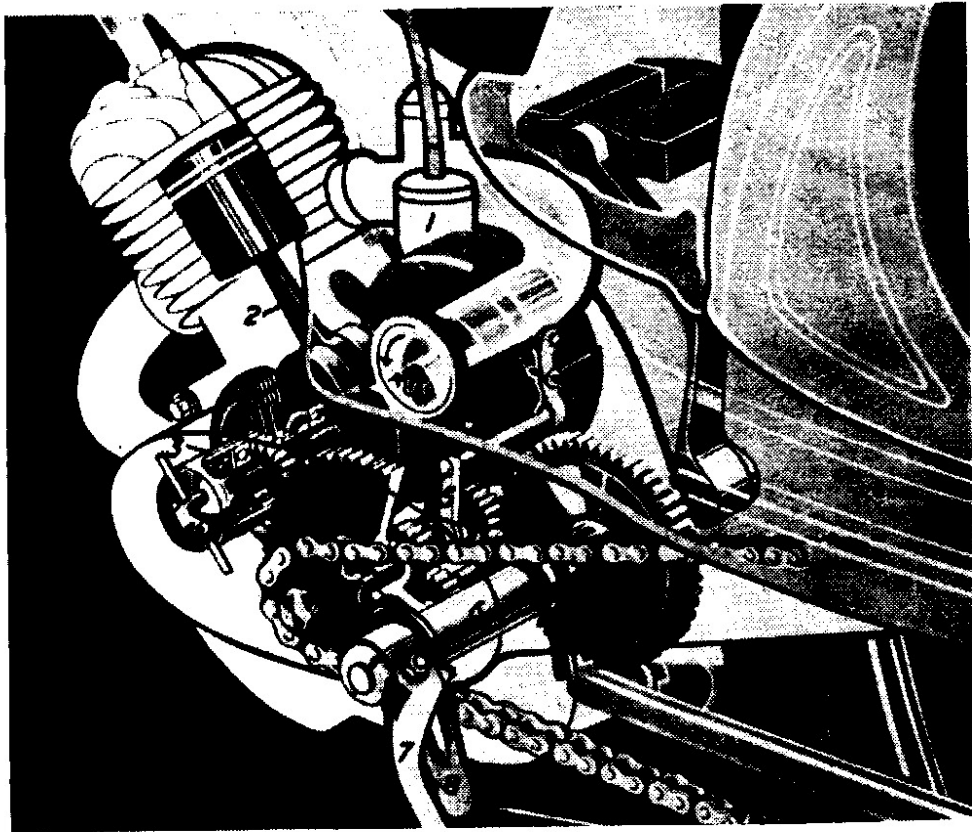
CUT-AWAY DRAWING OF THE ENGINE UNIT
